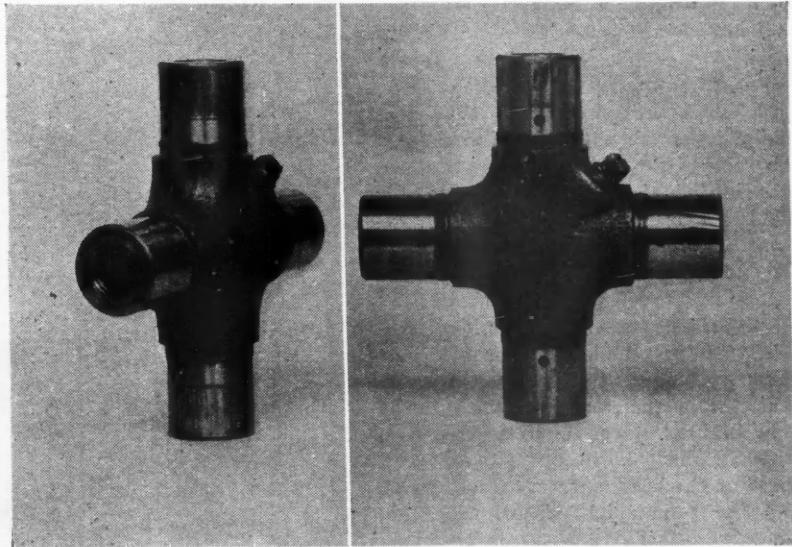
Universal-joint spider that was damaged while operating in a laboratory test fixture
